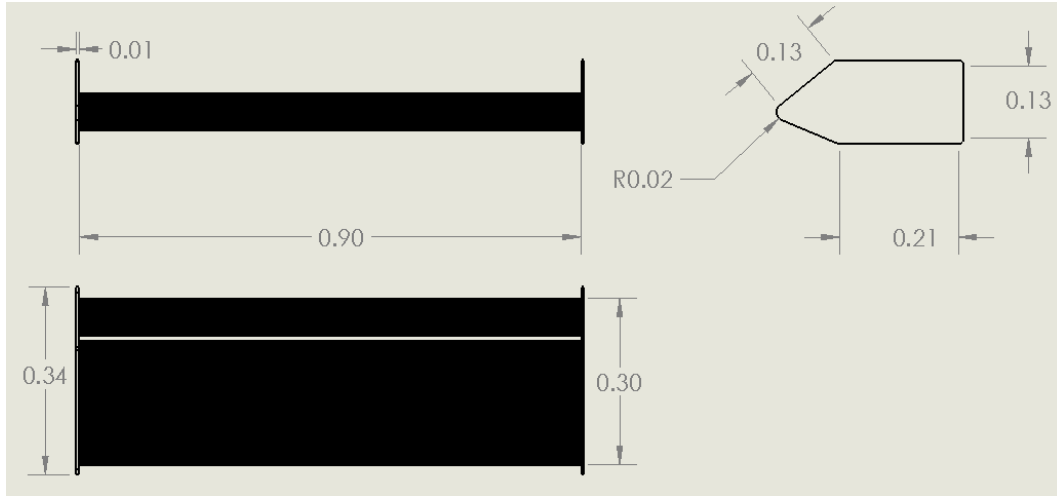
CAD drawing of original rear wing with all relevant dimensions in mm.
